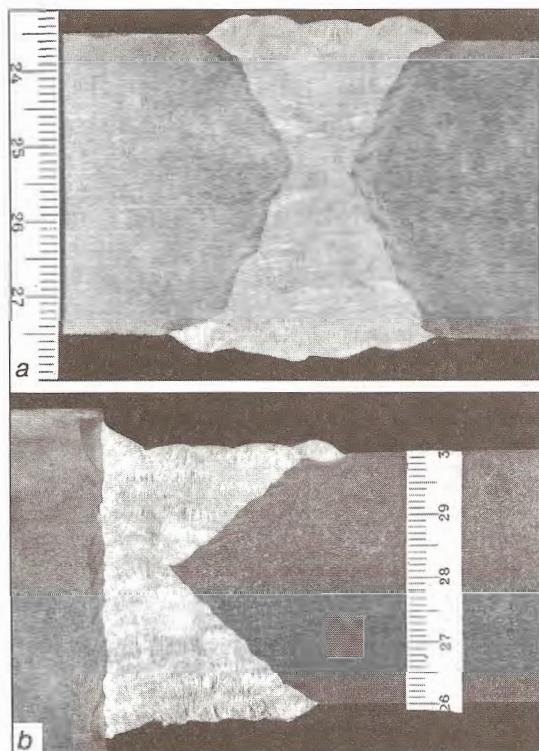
Macrosections of welded joints of rigid technological samples (*a* — TsNIITS, *b* — «round plug») made with electrodes ANVP-80
